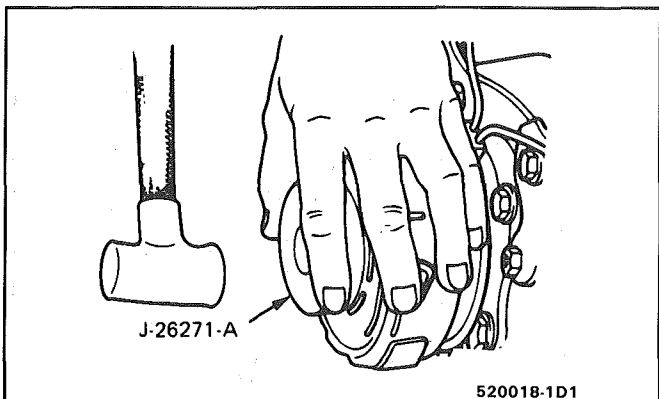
Installing Rotor and Bearing Asm. (On Car)
